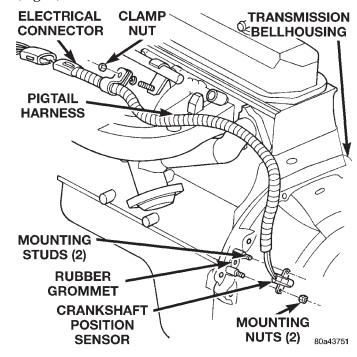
Crankshaft Position Sensor—2.5L Engine
